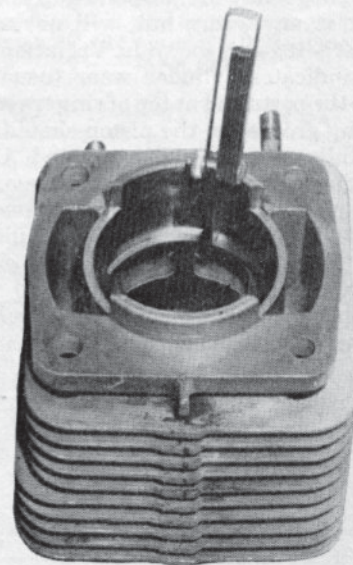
Clearance between ends of ring (ring end gap) should be measured with feeler gage as shown. Make sure ring is straight in cylinder.
